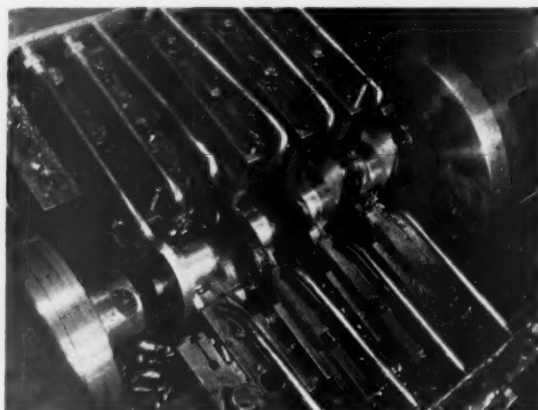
Part of the tooling on the machine shown in Fig. 8
